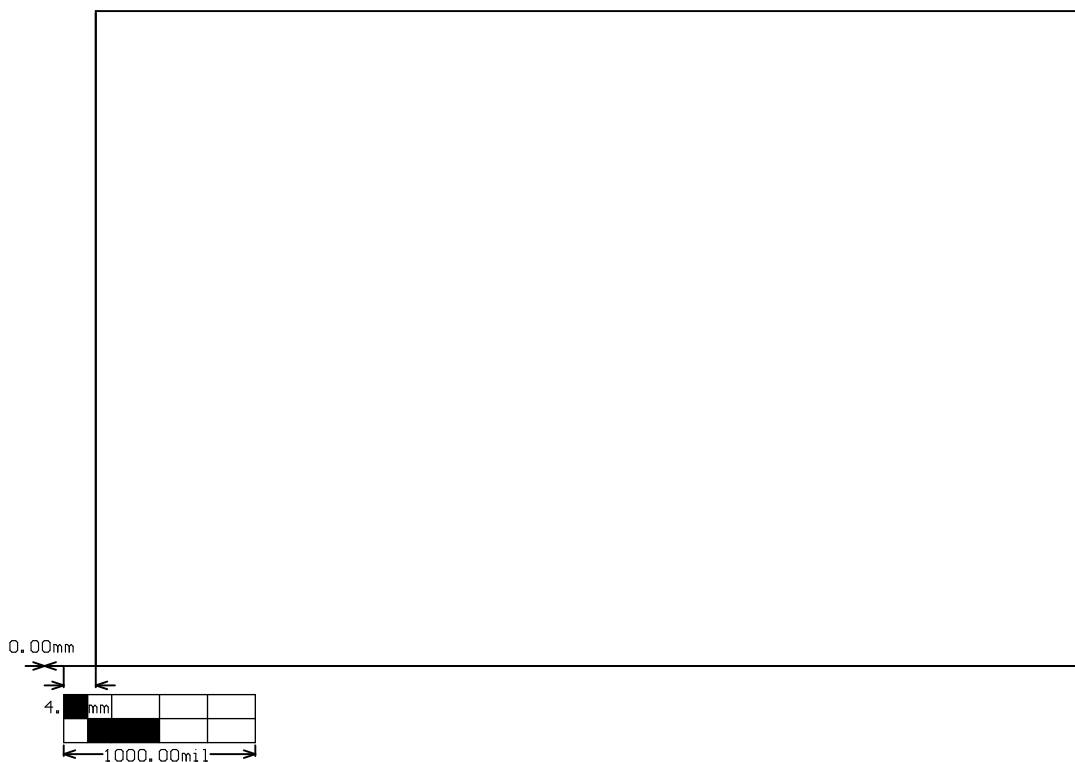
Board Dimensions (TPS7H60x3EVM-CVAL)
